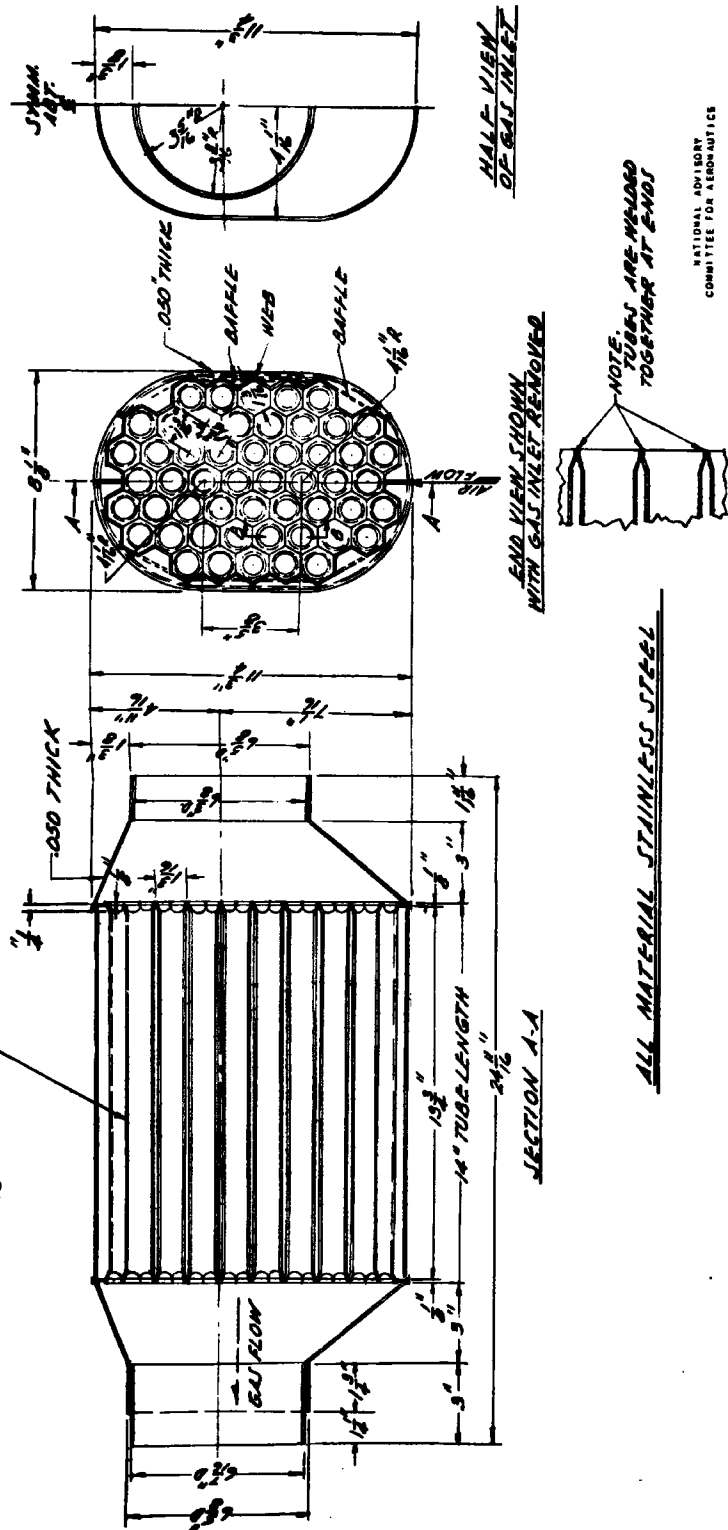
HEAT EXCHANGER 1, TUBULAR TYPE, TESTED IN
